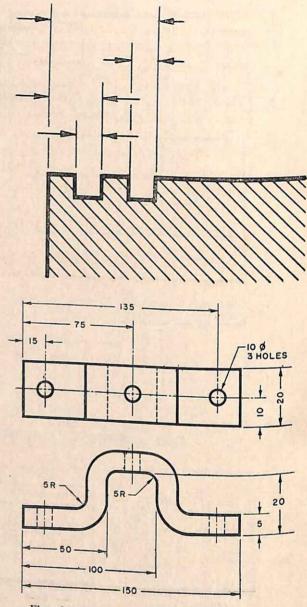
Further examples in dimensioning (IS: 696-1960)
